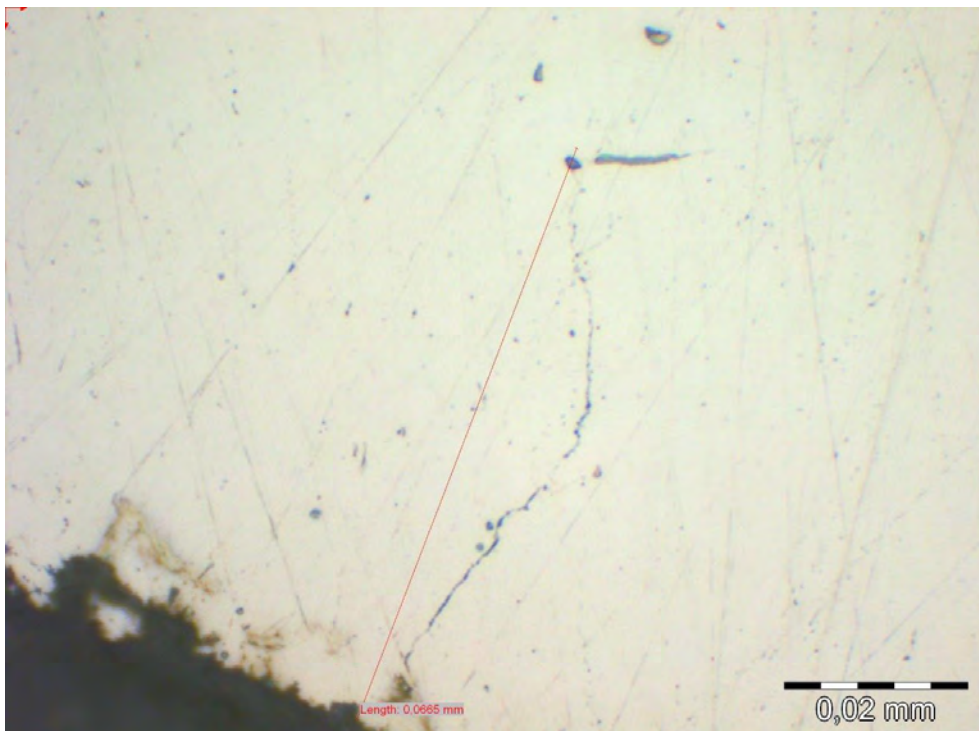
Crack A at segment B, third ridge on barrel no. SFK 0120-A
